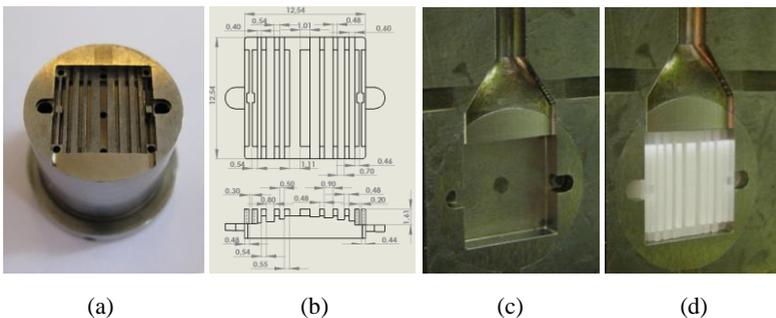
First shot: (a) micro structured tool, (b) part design; second shot: (c) tool cavity, (d) first moulded component inserted prior the 2k moulding cycle.
